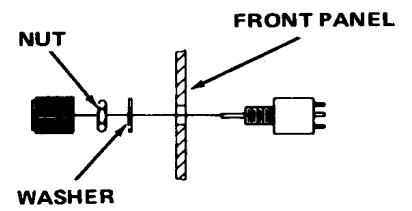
VOR Local Control Front Panel and Chassis-Mounted Parts Location Diagram (Sheet 2 of 4)
